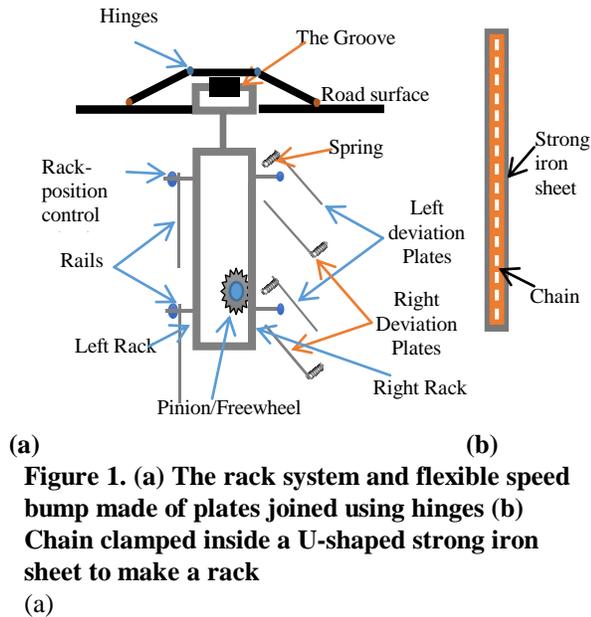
(a) The rack system and flexible speed bump made of plates joined using hinges (b) Chain clamped inside a U-shaped strong iron sheet to make a rack
